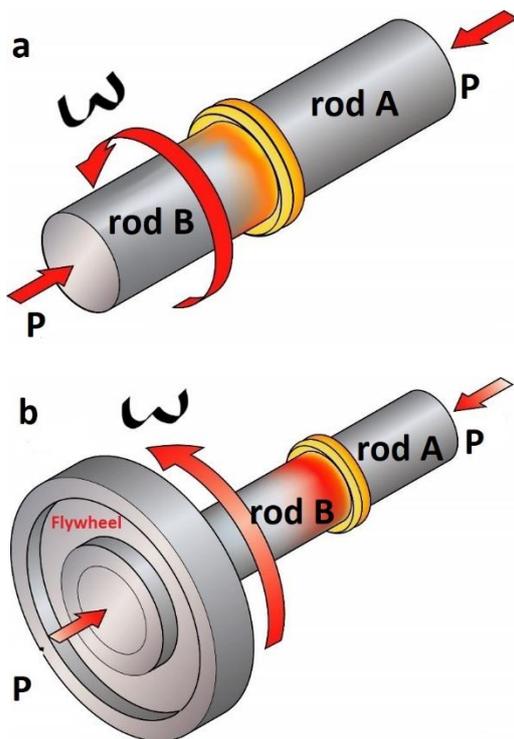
(a) Continuous drive friction welding and (b) inertia friction welding. [5]
